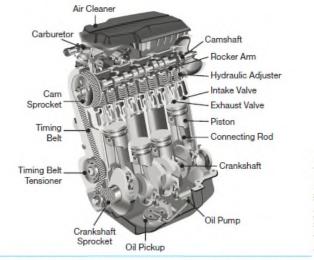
Rotating shaft work can be found in many devices, including a turbine and the crankshaft of a reciprocating engine.
